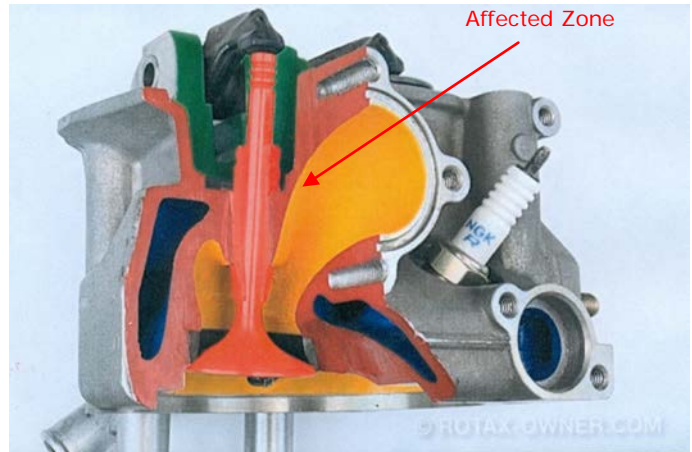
A cutaway of a 9 series cylinder head showing where cutter may have broken through casting. (Rotax-Owner.com)
